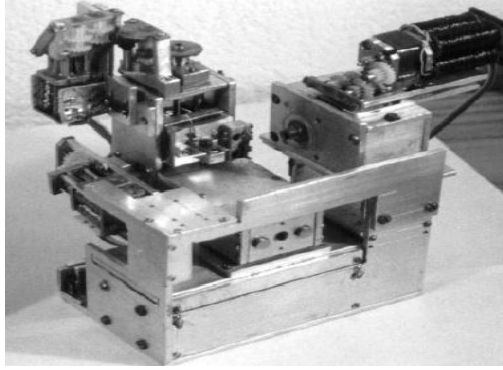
Micro machine tool prototype machined by E. Kussul
